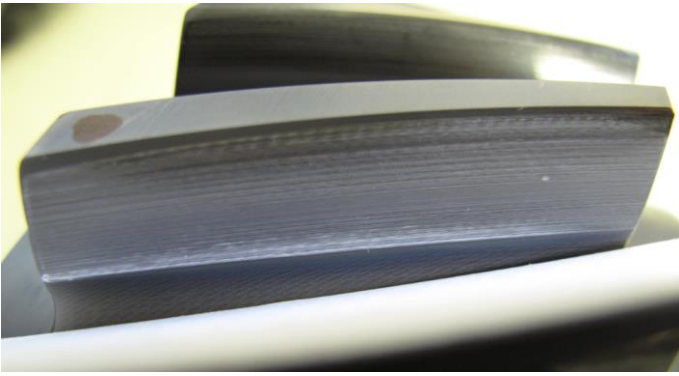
Photo showing typical surface condition of a WC/C coated test gear after it has been run for 48 million cycles at the same test conditions as that for as-ground gears. Gear flank surface is seen to have only minor wear.
